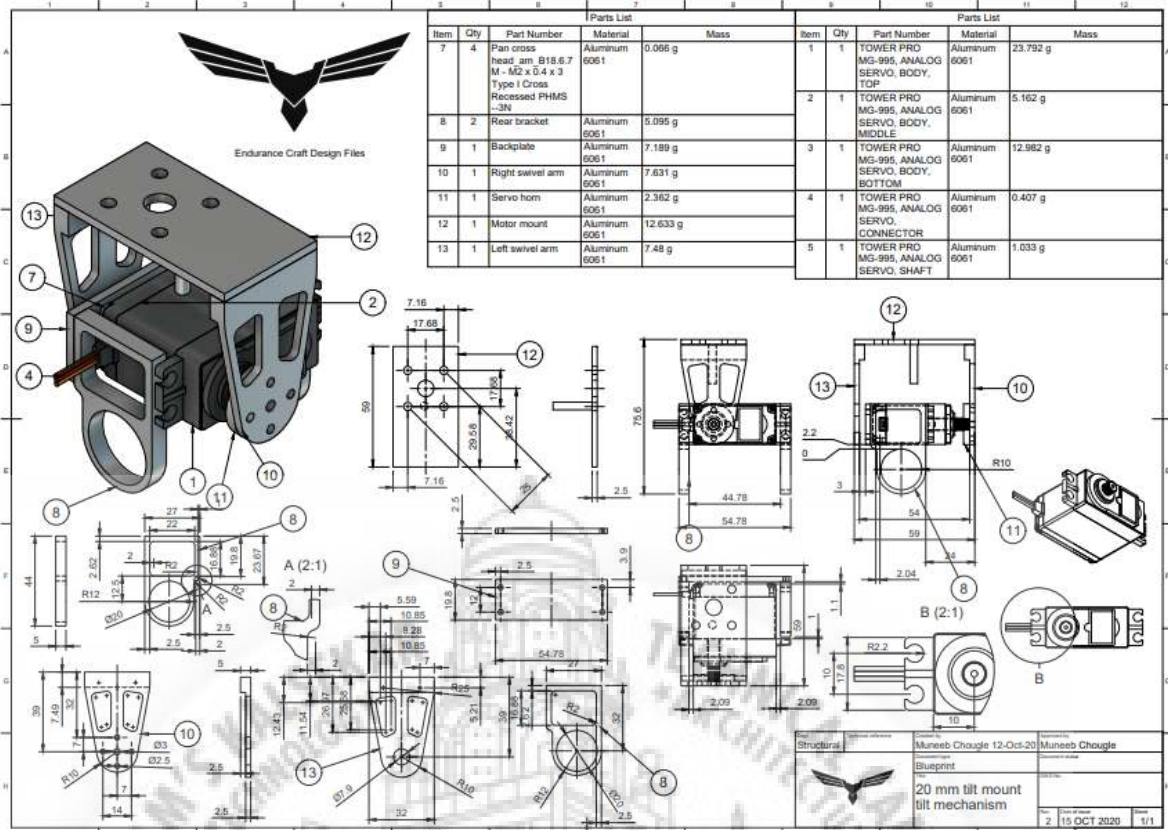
Tilt rotor mount mechanism blueprint.
